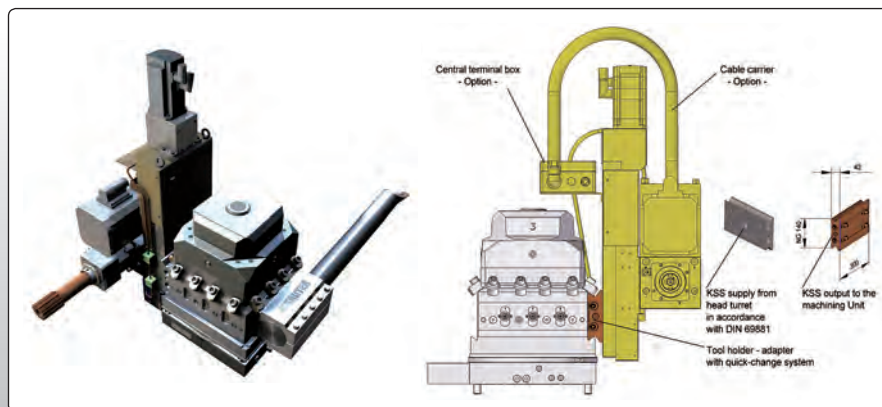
Turret for heavy lathes [Sauter]
